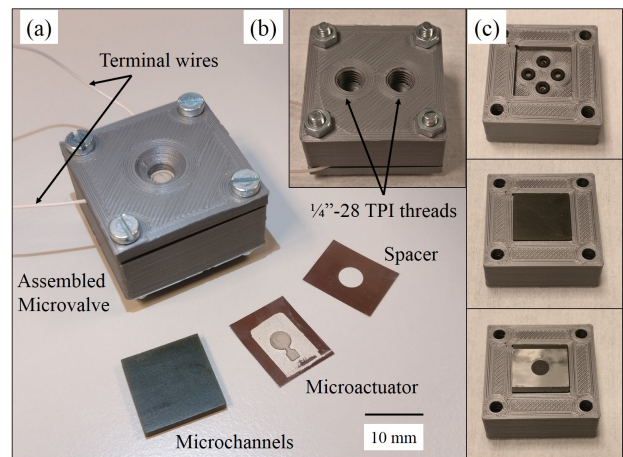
(a) Assembled microvalve holder with constituent parts. Terminal wires are copper with 0.5 mm diameter. (b) Bottom view of the holder (c) First step: O-rings placed in grooves, Second step: Microchannels placed in groove, Third step: Spacer placed over microchannels, Fourth step (not shown): Actuator is placed and then assembly is clamped.
